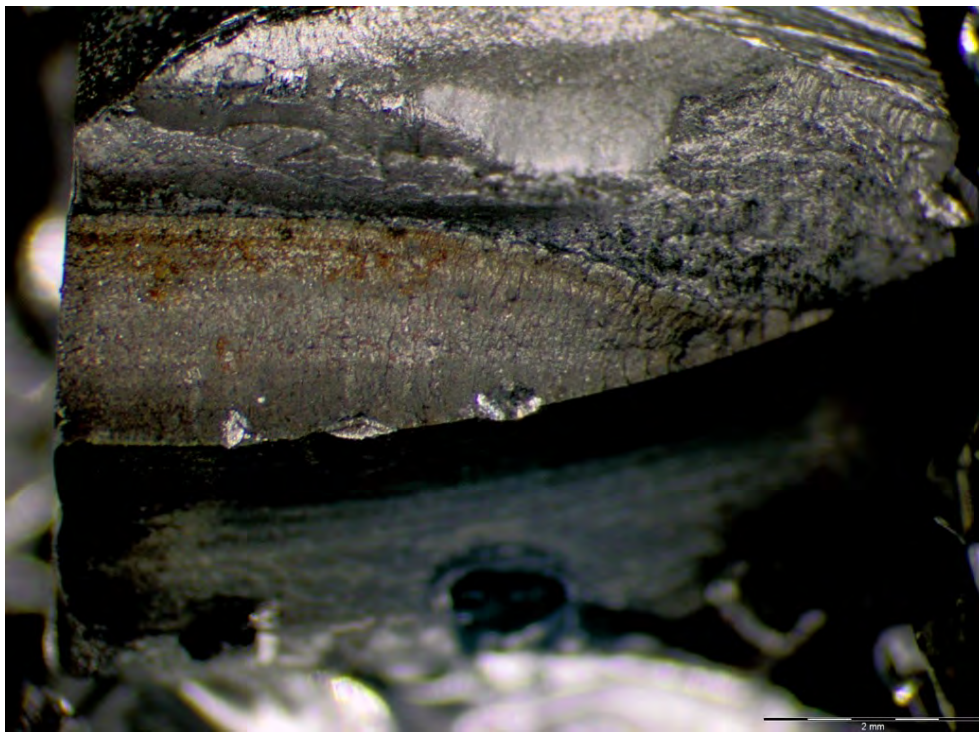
Face of fatigue crack at the first ridge at segment B on barrel no. 14389
